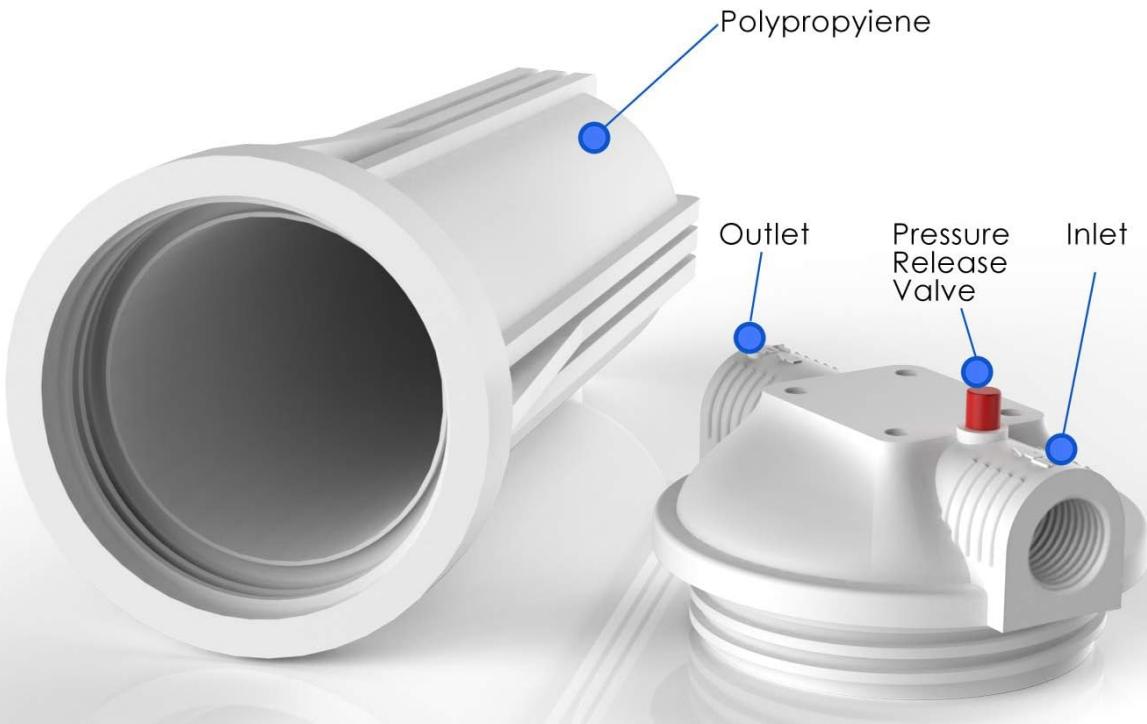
Exploded view of the filter housing showing the inlet, outlet, pressure release valve, and the polypropylene material construction.
